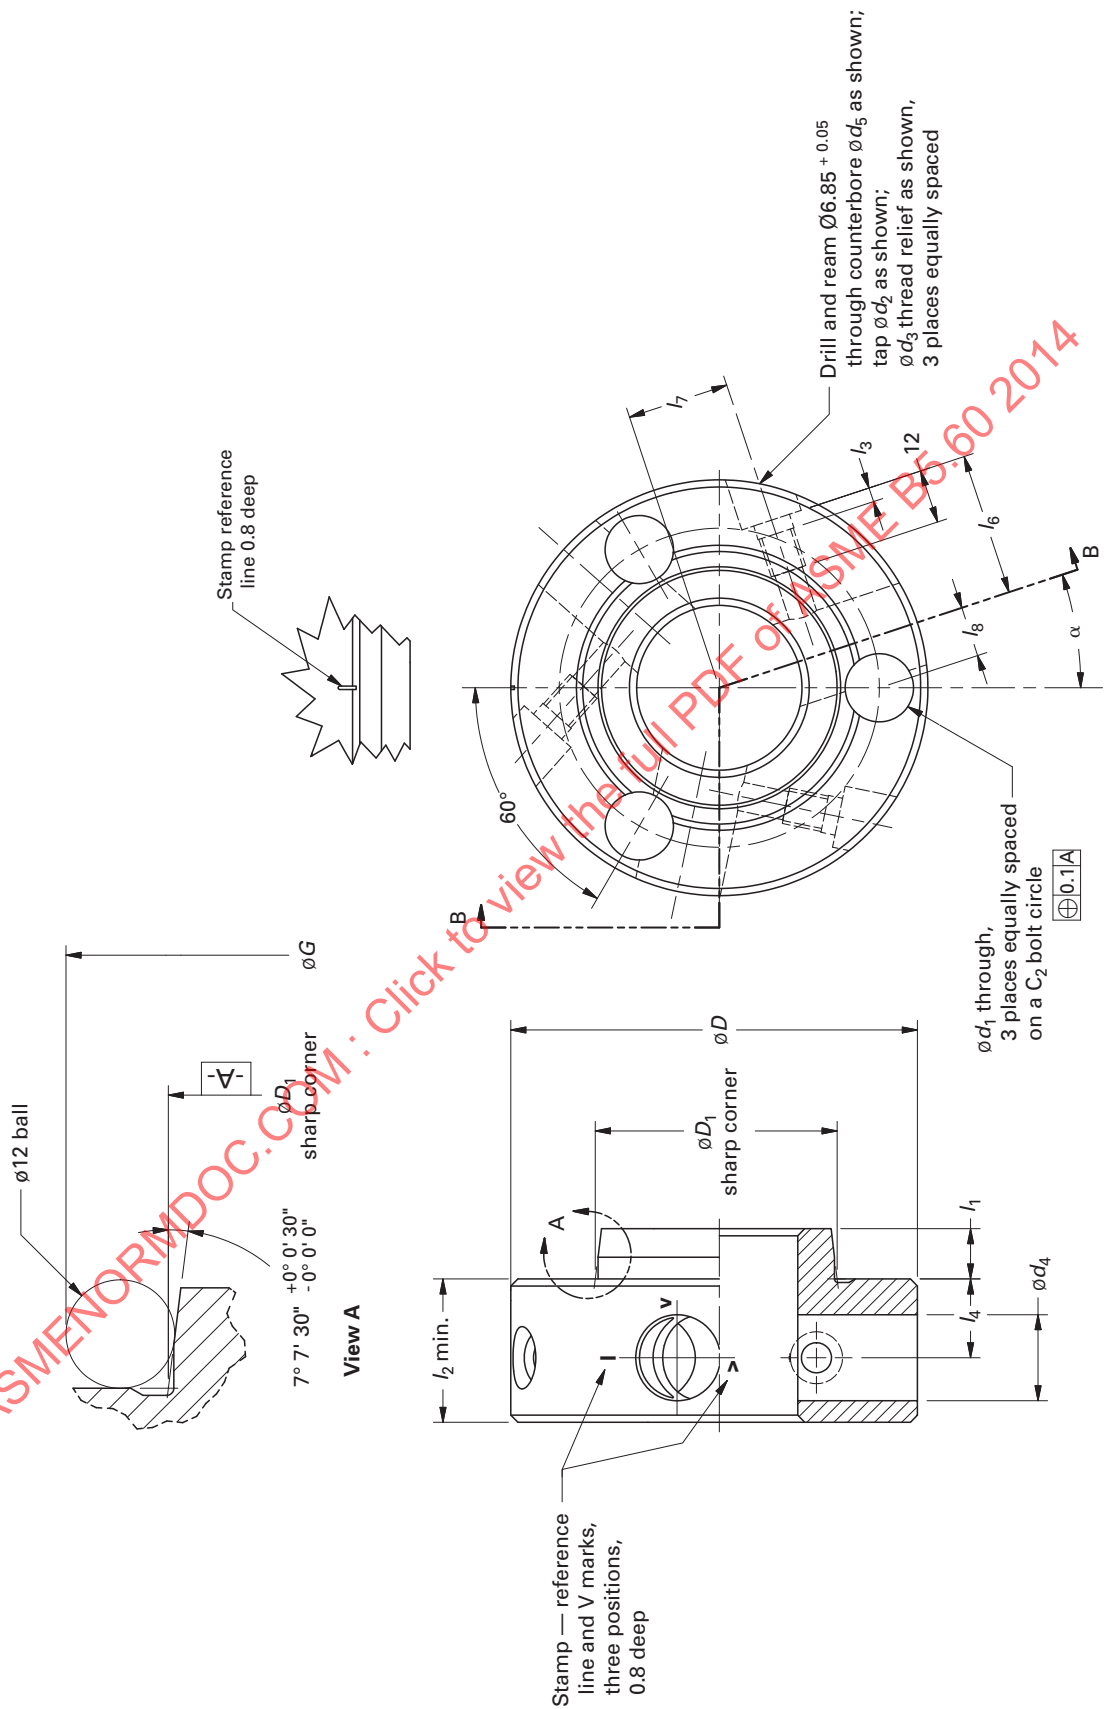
Type D Spindle Location of Holes for Size D-4
